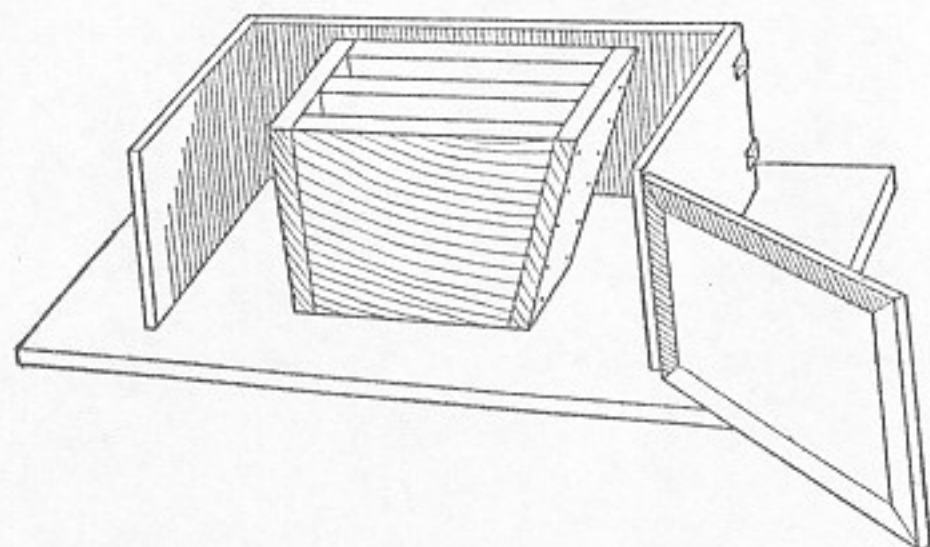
CEMENT BLOCK MACHINE OPEN
